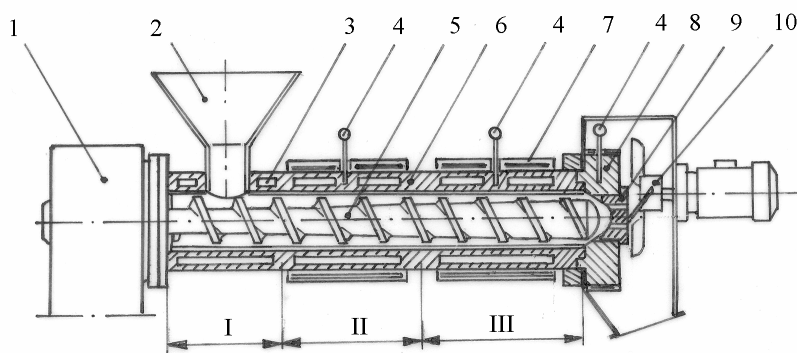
A cross-section of a single-screw extrusion-cooker: 1 - engine, 2 - feeder, 3 - cooling jacket, 4 - thermocouple, 5 – screw, 6 - barrel, 7 - heating jacket, 8 - head, 9 - net, 10 -cutter, I - transport section, II – compression section, III – melting and plasticization section (Mościcki et al., 2009).
